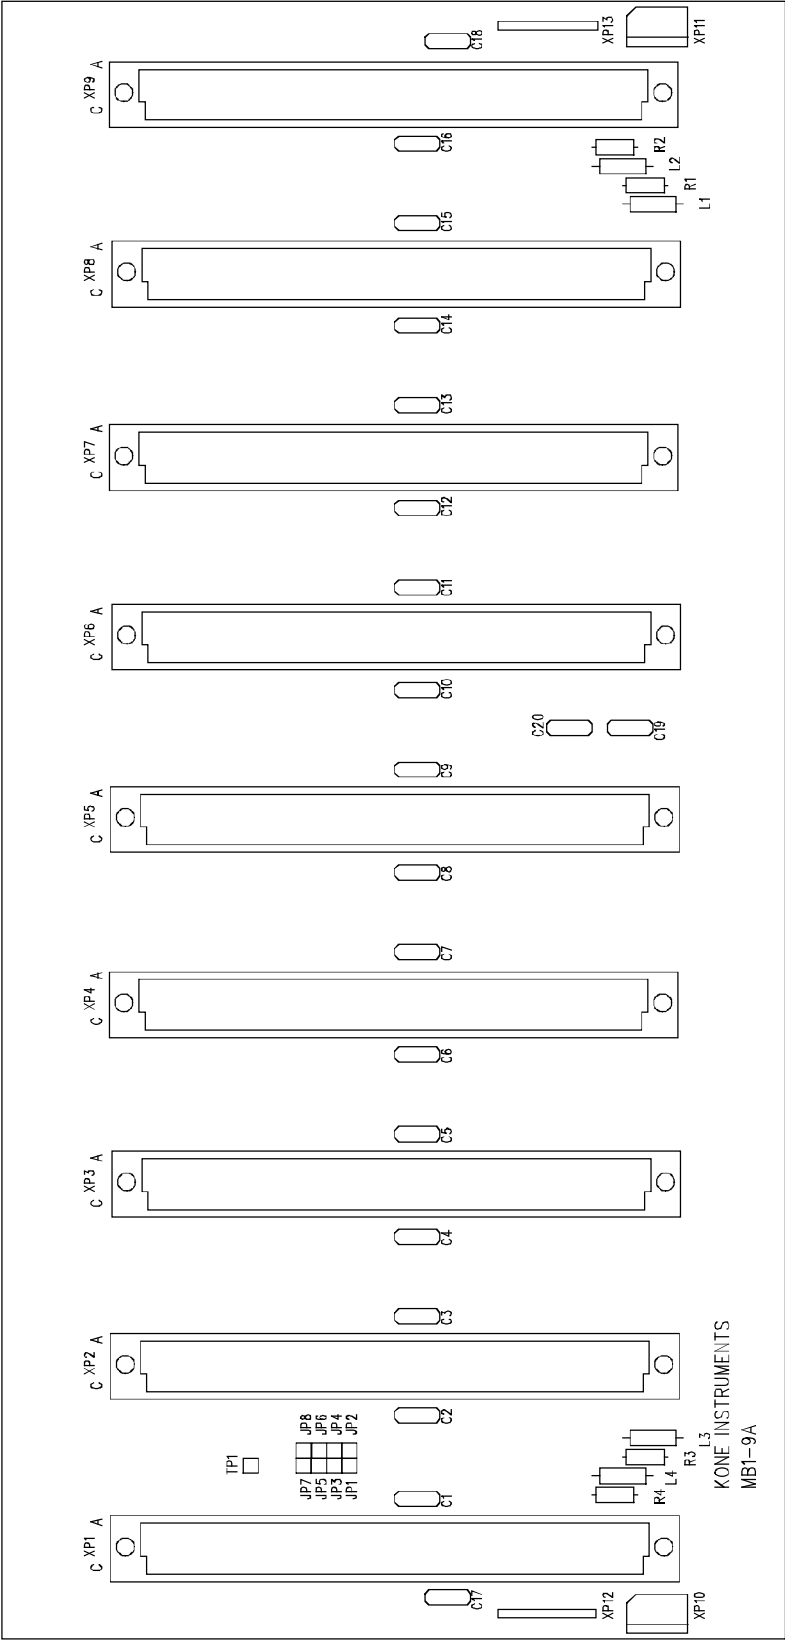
THE COMPONENT LAYOUT OF MB1-9
